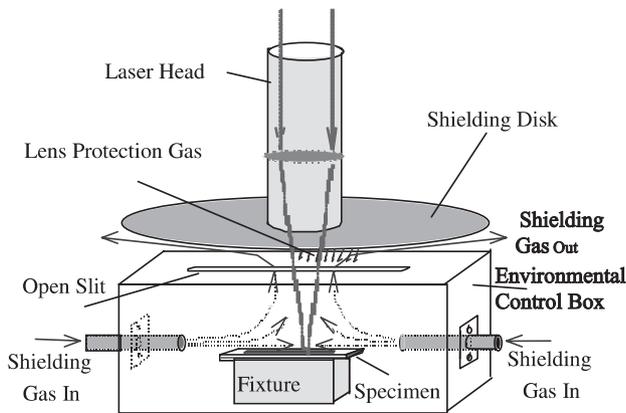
Set-up of the laser welding system with welding environmental control box.
